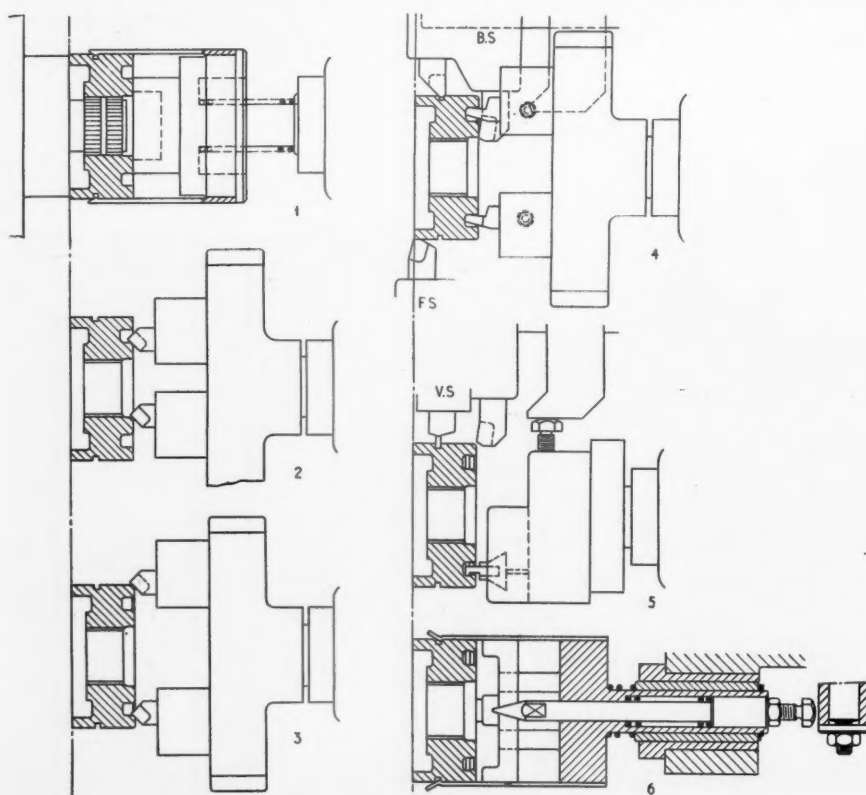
Finishing synchronizer bodies on the Tarex machine. Located parts are automatically loaded from a drum-type magazine and automatically unloaded
